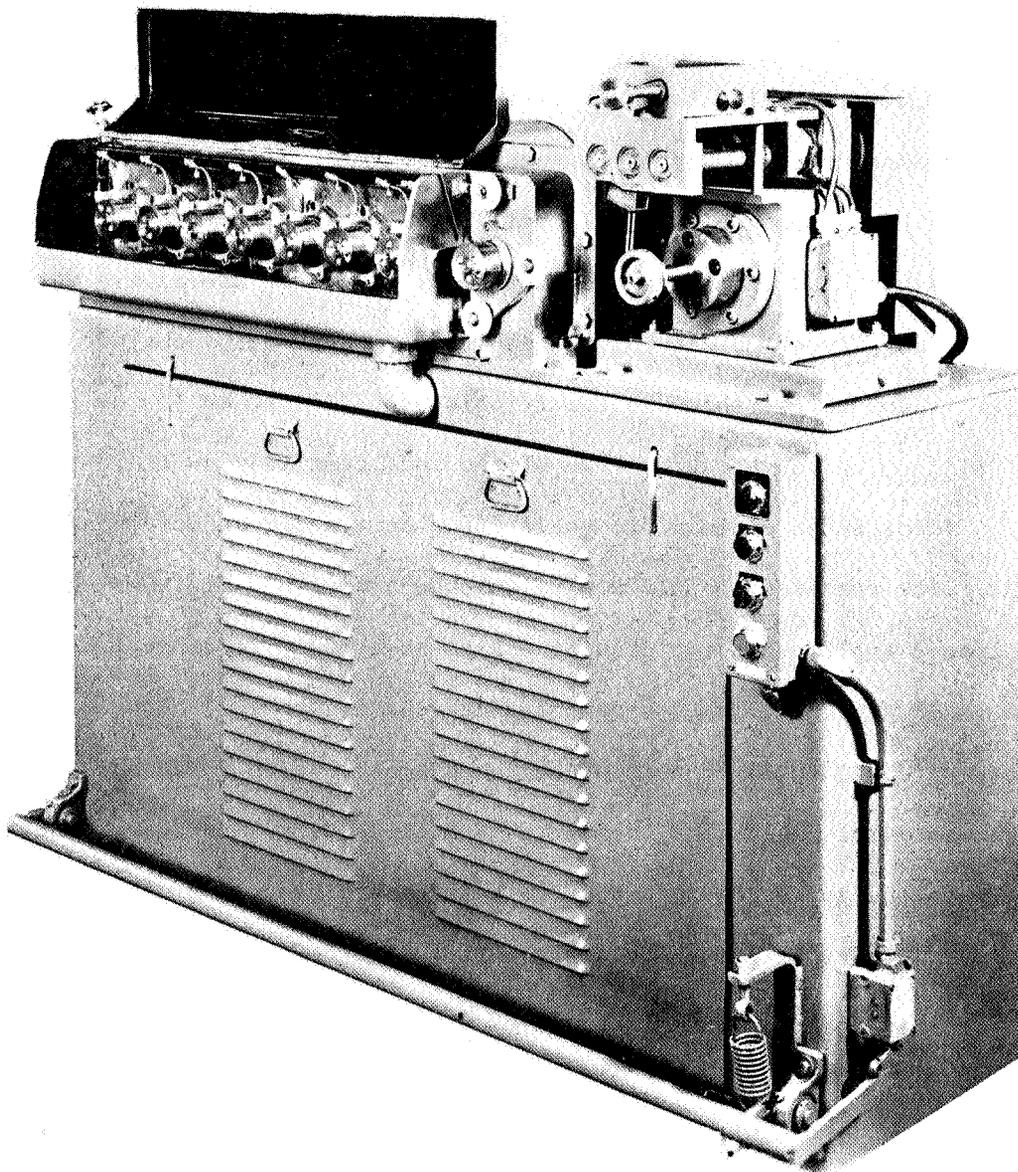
EIGHT-DIE FINE-WIRE MACHINE
